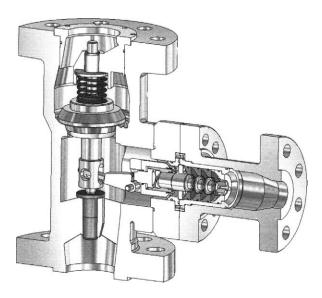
Automatic pump recirculation valve, straight-through version Courtesy of Blackhall Engineering Ltd
